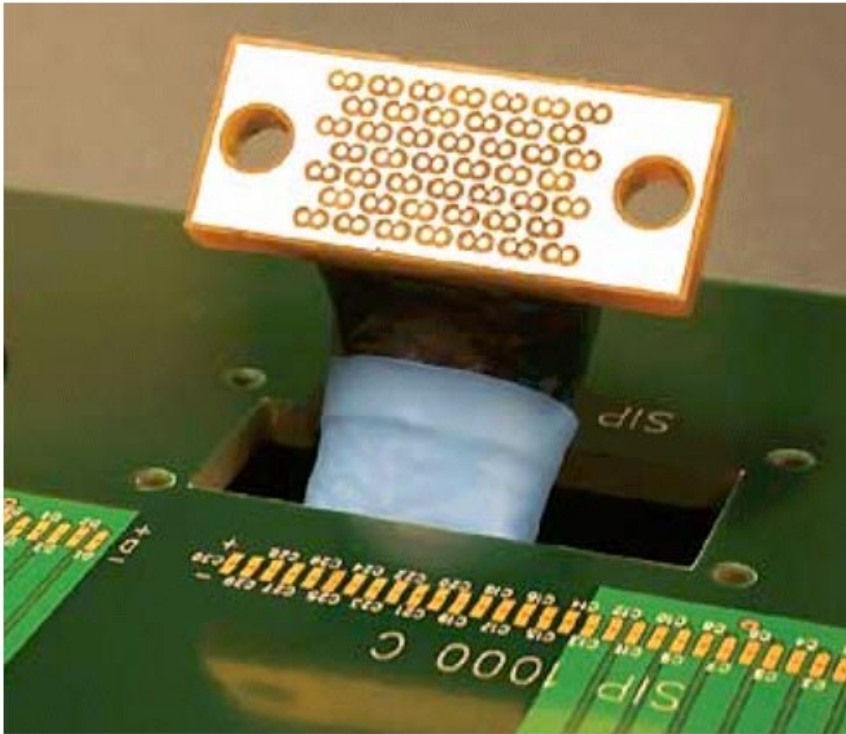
The Silicon Pipe ChannelPlane shown above is a backplane cable assembly that consists of a flush mount connector compatible with the Winchester SIP-1000 backplane connector
